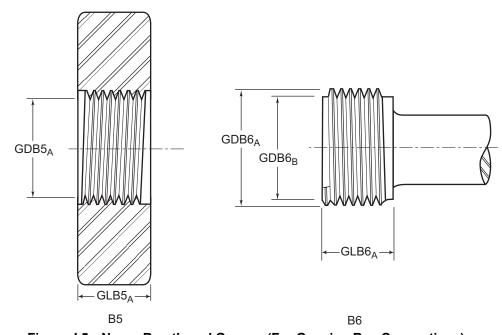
No-go Box-thread Gauges (For Gauging Box Connections)
